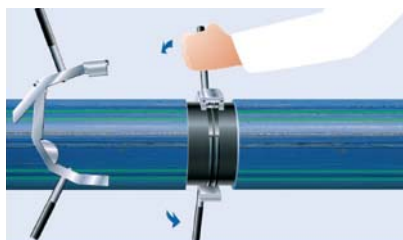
Removal of the weld bead with an external bead remover
